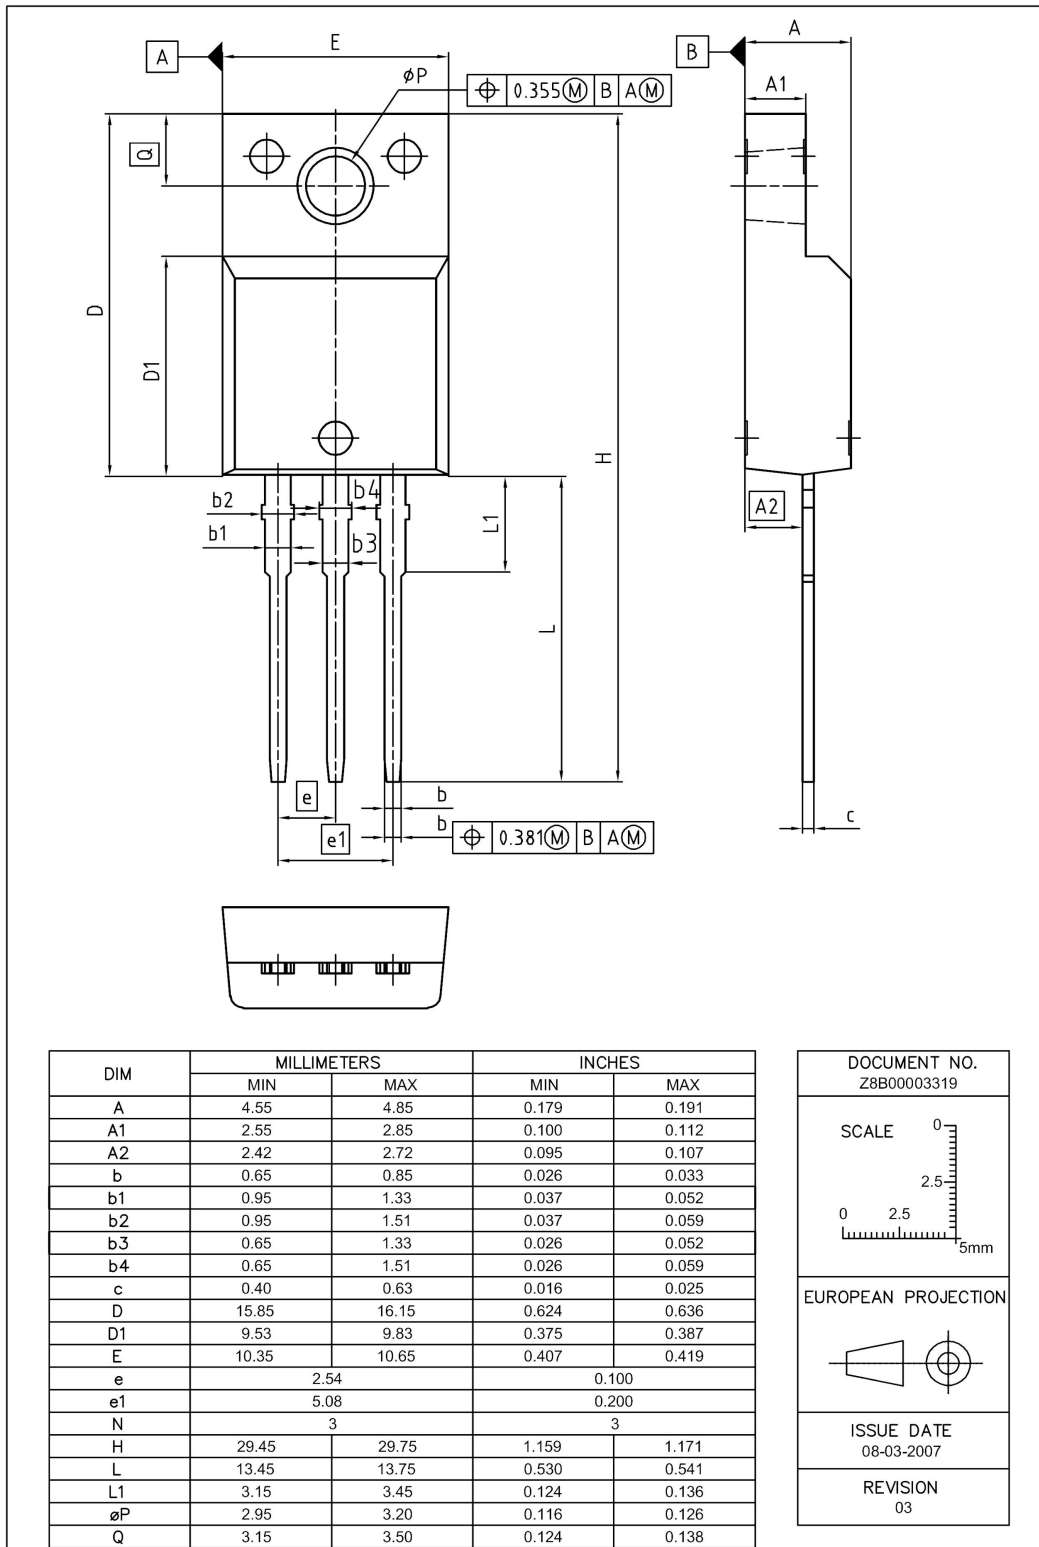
Outline PG-TO 220 FullPAK, dimensions in mm/inches
